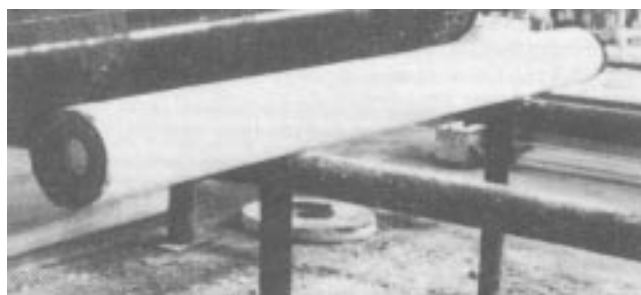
Casting 10, 2.8 m (9.3 ft) long, about 20 min after removal from mold. 0.05×
